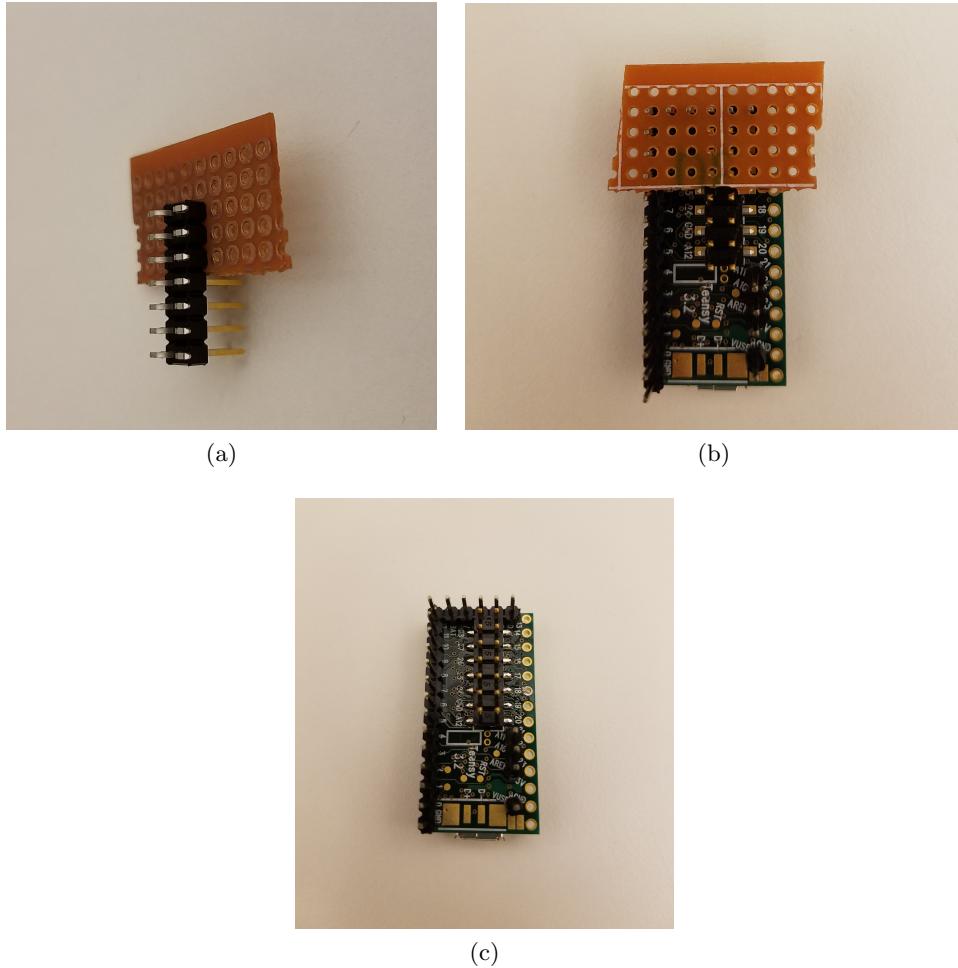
Aligning and soldering the surface mount headers for the Teensy.
